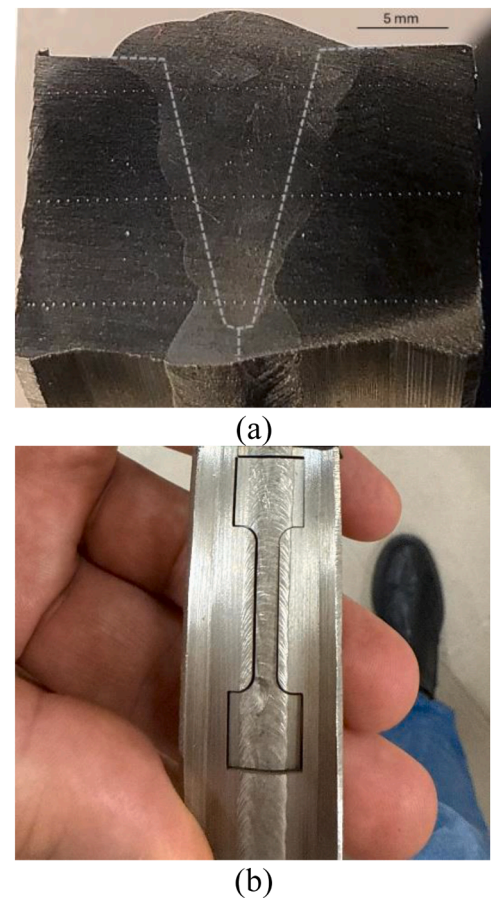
(a) Cross section of the weld with dashed lines representing the bevel (before the welding) and the hardness measurements along the three paths. (b) Wire-electro-discharge machined ring portion of the welded pipe.
